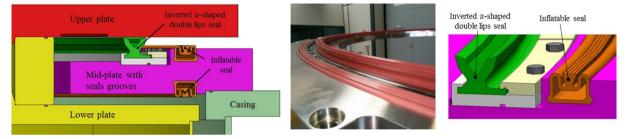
Assembly of the inflatable and inverted- π shaped seals on the RST
